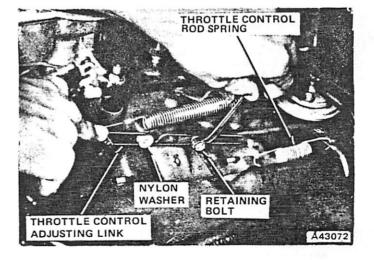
C-32 Tightening Link Retaining Bolt— Eight-Cylinder Engine
